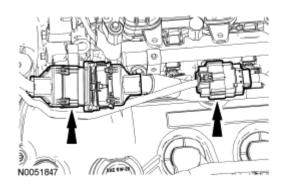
Locating Fuel Hose Routing Clip Courtesy of FORD MOTOR CO.
